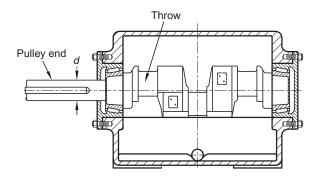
Schematic diagram of a cast crankshaft. Courtesy of Ingersoll Rand Company.
